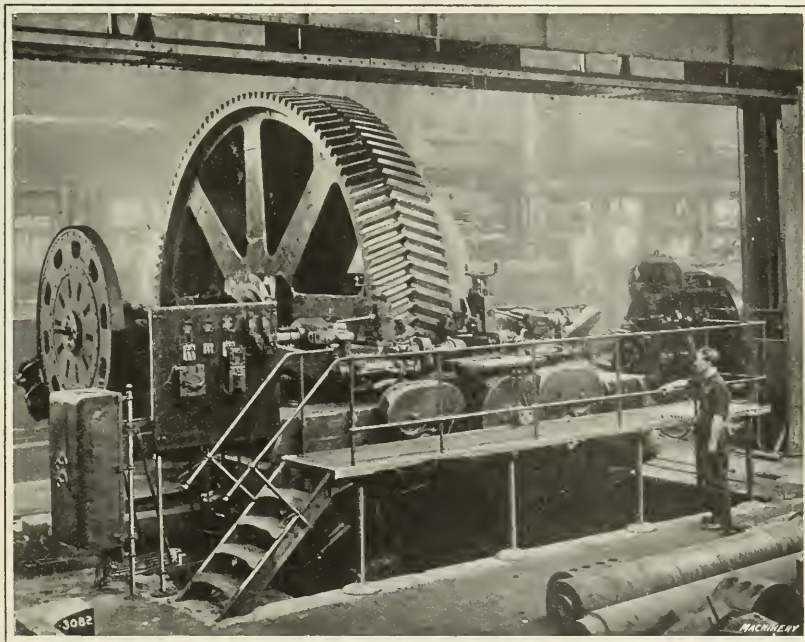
Herringbone Gear Tooth Planer developed by Mesta Machine Co. for Heavy Work
